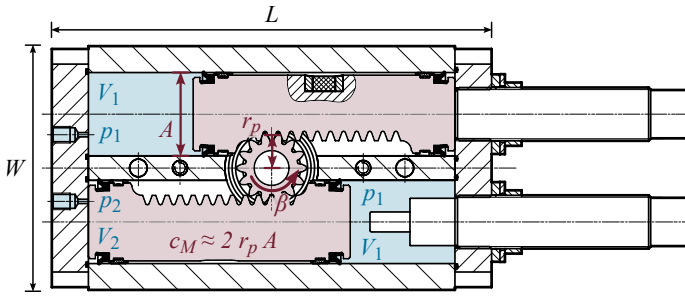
CROSS-SECTIONAL VIEW OF THE DOUBLE-PISTON SEMI-ROTARY ACTUATOR (FESTO DRRD-25-180-FH-PA WITH GEAR RACKS AND A PINION¹) AND DEFINITION OF DESIGN PARAMETERS.
